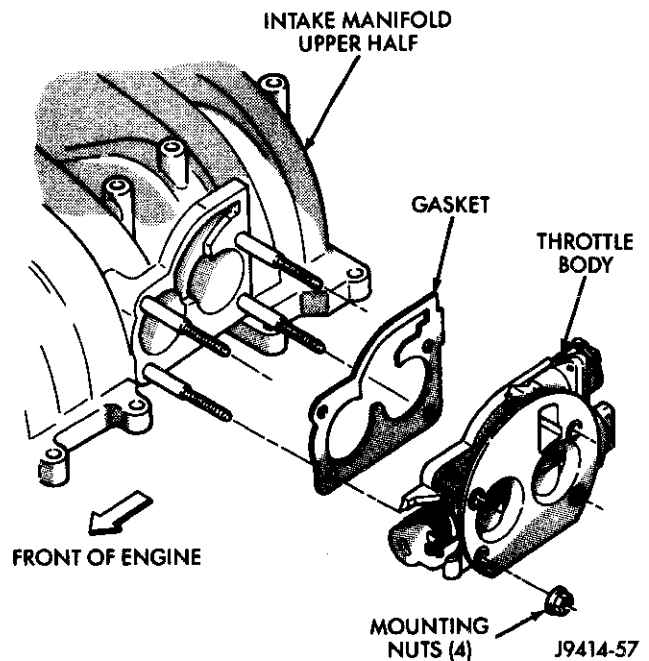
Throttle Body Mounting Nuts—8.0L Engine
